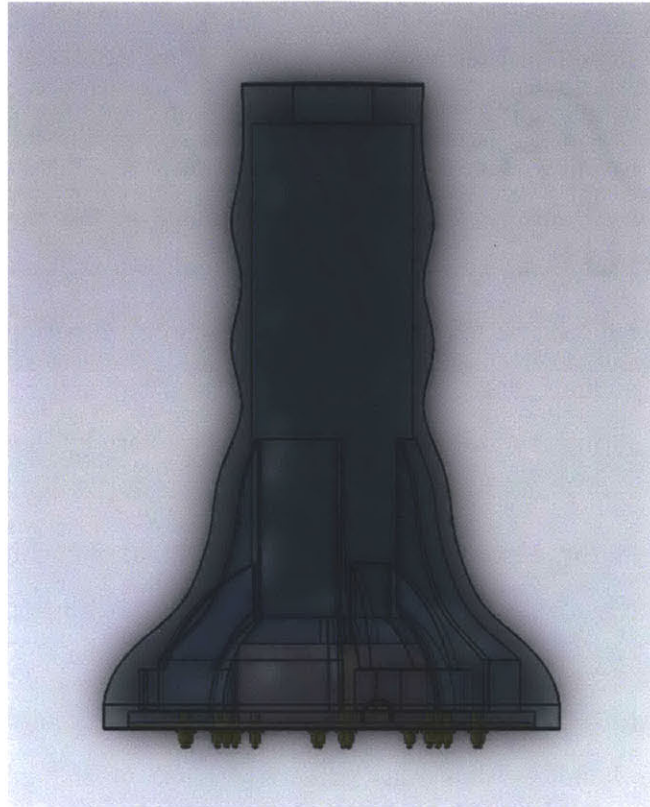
Front view of the CAD Model of the male connector assembly. The electromagnet is seated in a support well and attached from back with a mounting screw. The male PCB with spring-loaded pins is designed in an annular shape to fit around the electromagnet and provide a flat surface that is flush with the magnet.
